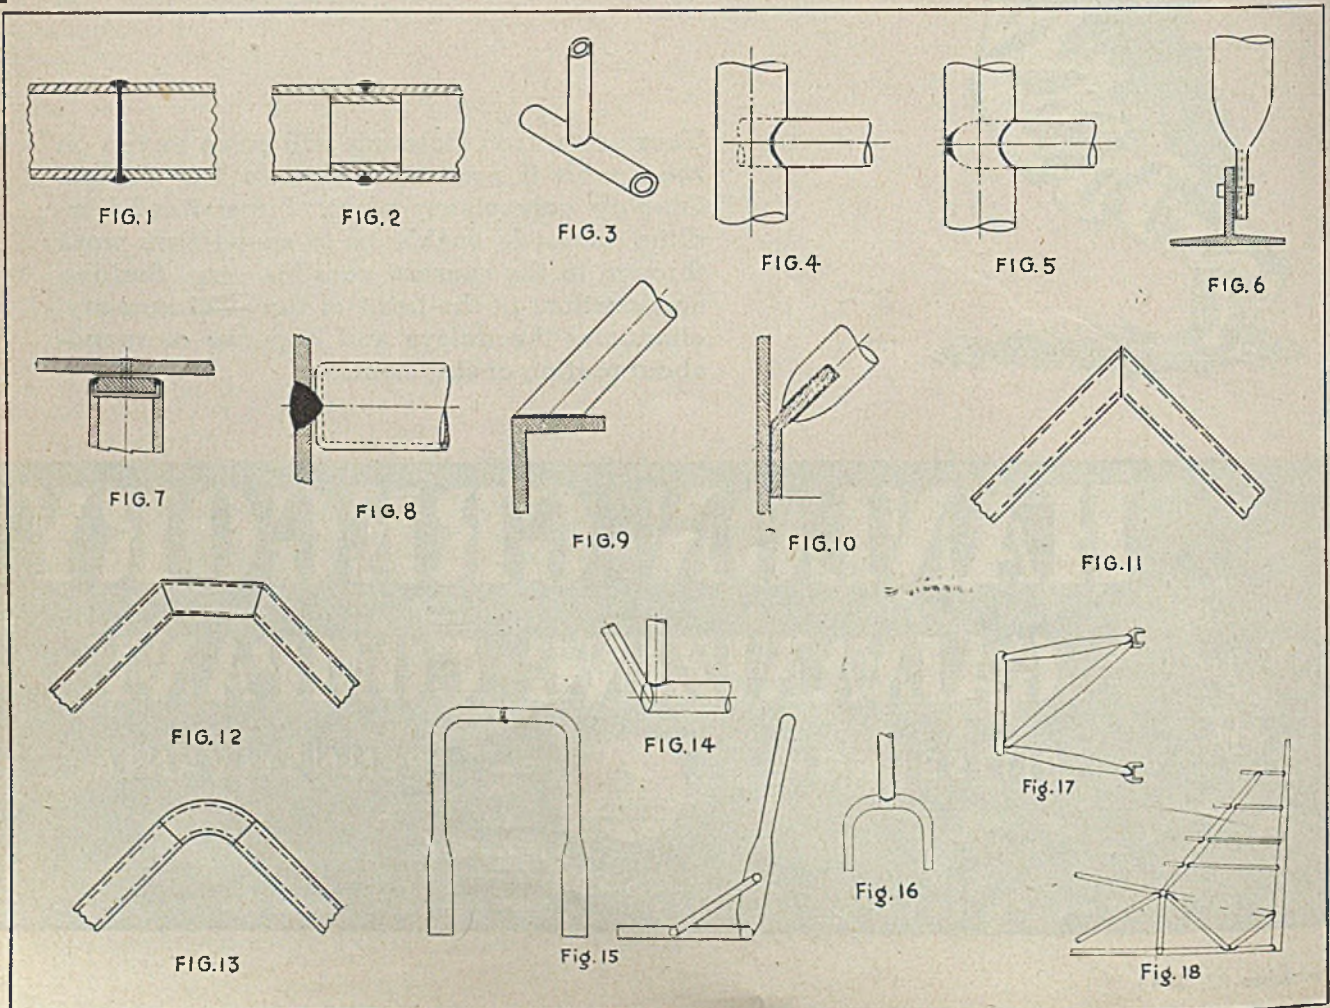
This fixes the end of the smaller tube with a weld in shear, and reduces the amount of bending in the tube wall.
